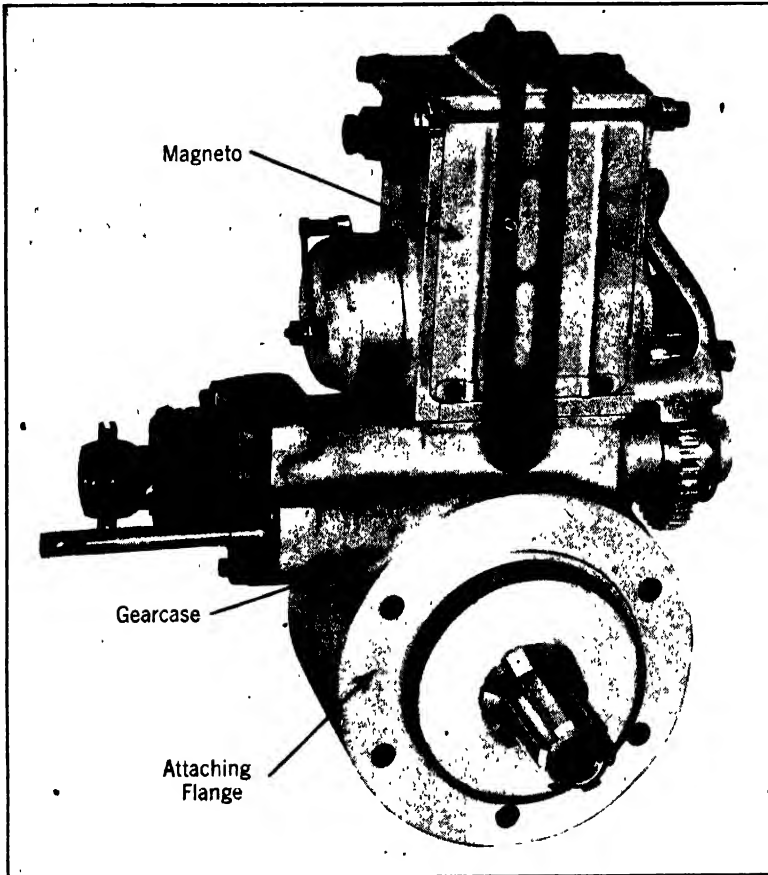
Wright Hand Turning Gear and Starting Magneto.
